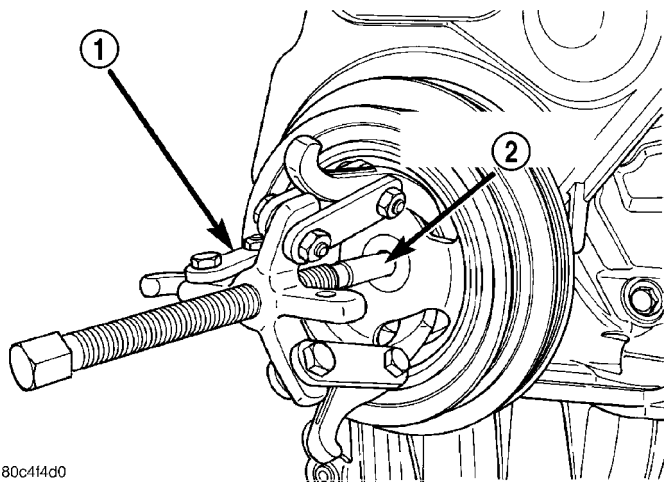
CRANKSHAFT DAMPER - REMOVAL - TYPICAL
